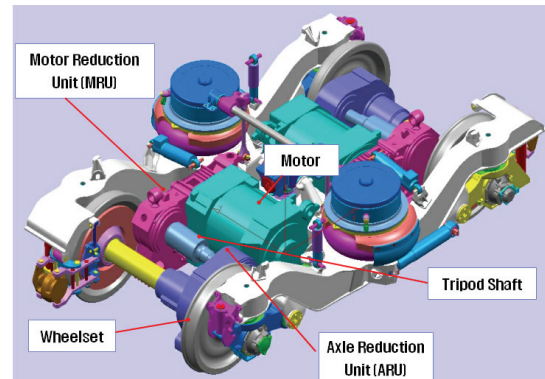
Schematic view of reduction units, motor and bogie for Korea high-speed rail
